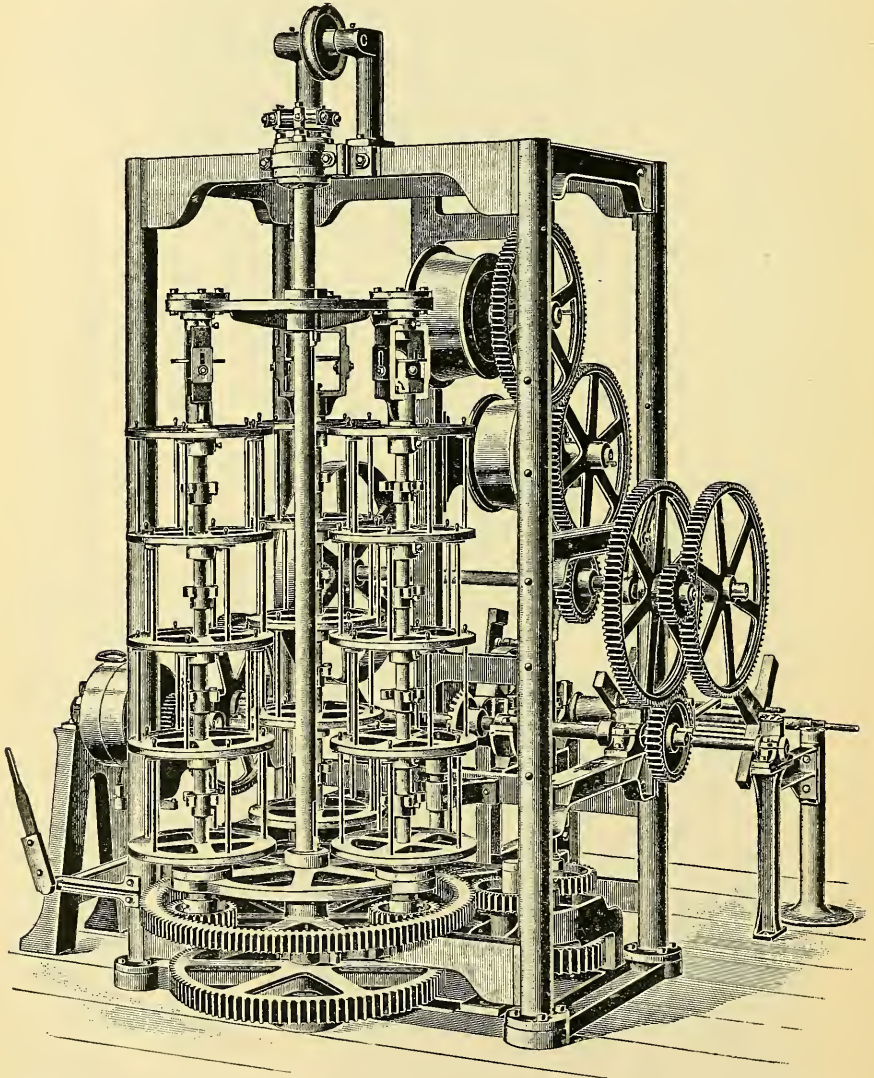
Sixty-thread vertical compound rope machine to form and lay rope from $\frac{3}{8}$ inch diameter to 1 inch diameter. (Made by The Watson Machine Co., Paterson, N.J., U.S.A.)
